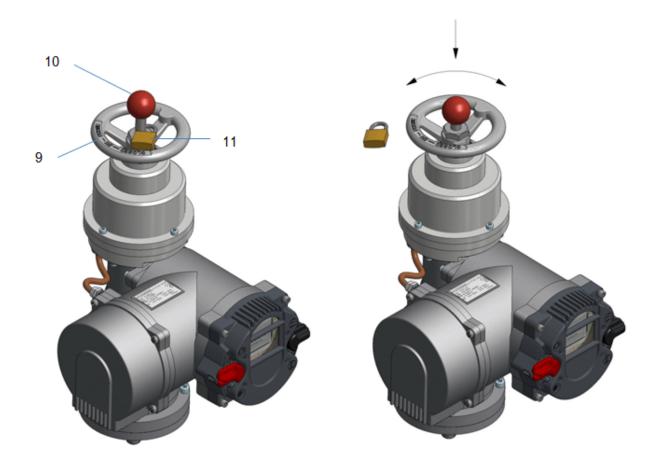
9... Handwheel, 10... shift rod, 11... padlock
